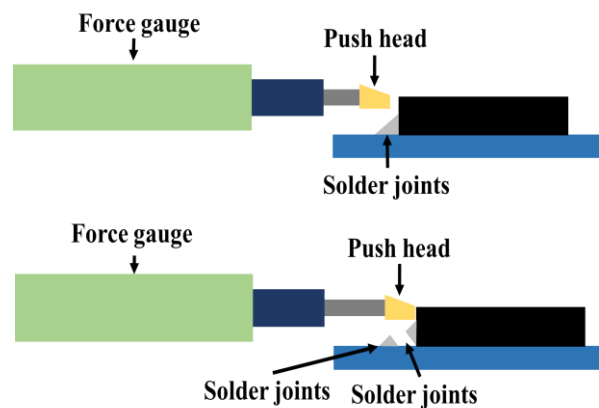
Methods of testing the shear strength of solder joints in HGA
